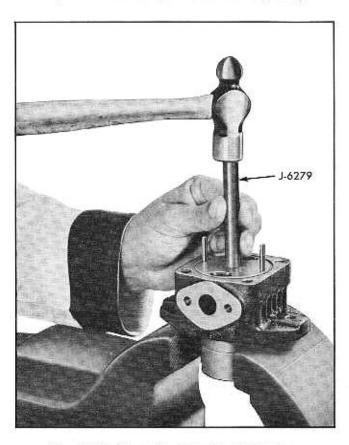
Removing Inner Needle Bearing from Pump Body
